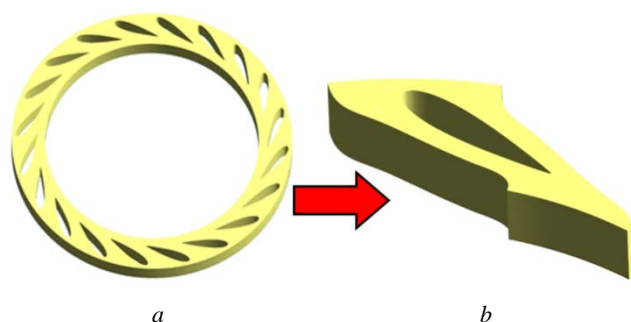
Obtaining the calculated sector of the guide vane: *a* – 3D solid model of the guide vane; *b* – one calculated sector of the guide vane
